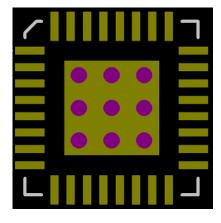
ADMTV102 QFN Recommended PCB Landing Pattern.
